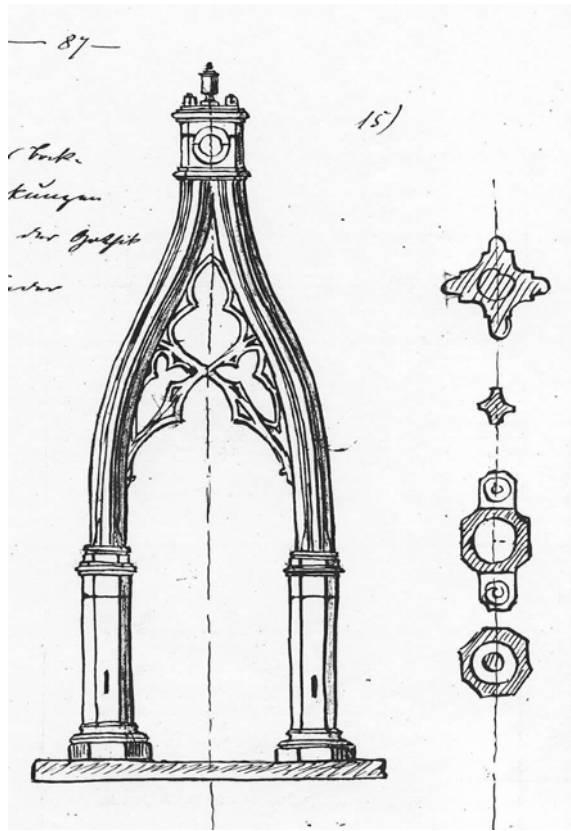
Reuleaux's designs for bearings pedestals in machines (Courtesy Deutsches Museum Archive)
